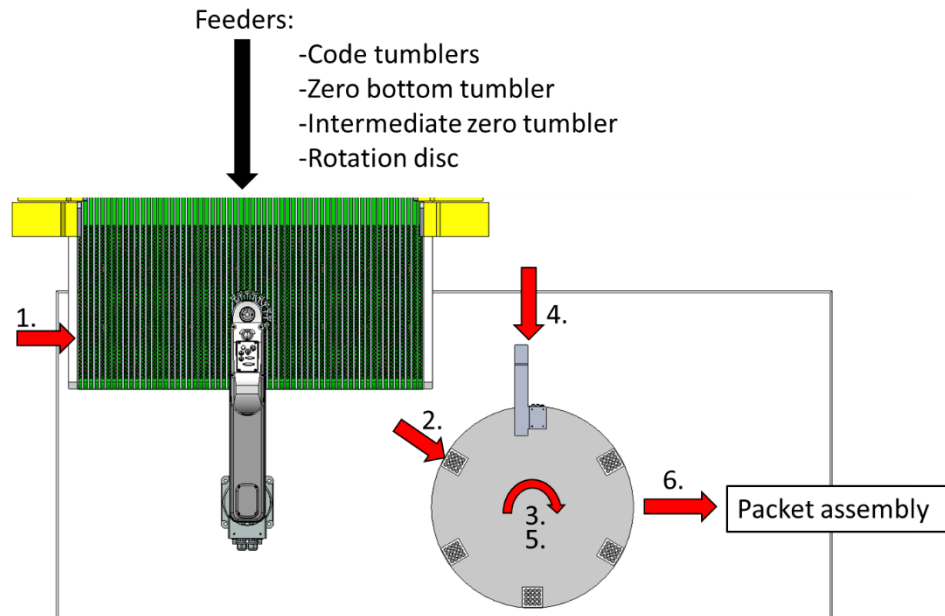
Steps for picking parts from conveyor and making them ready for assembly.
